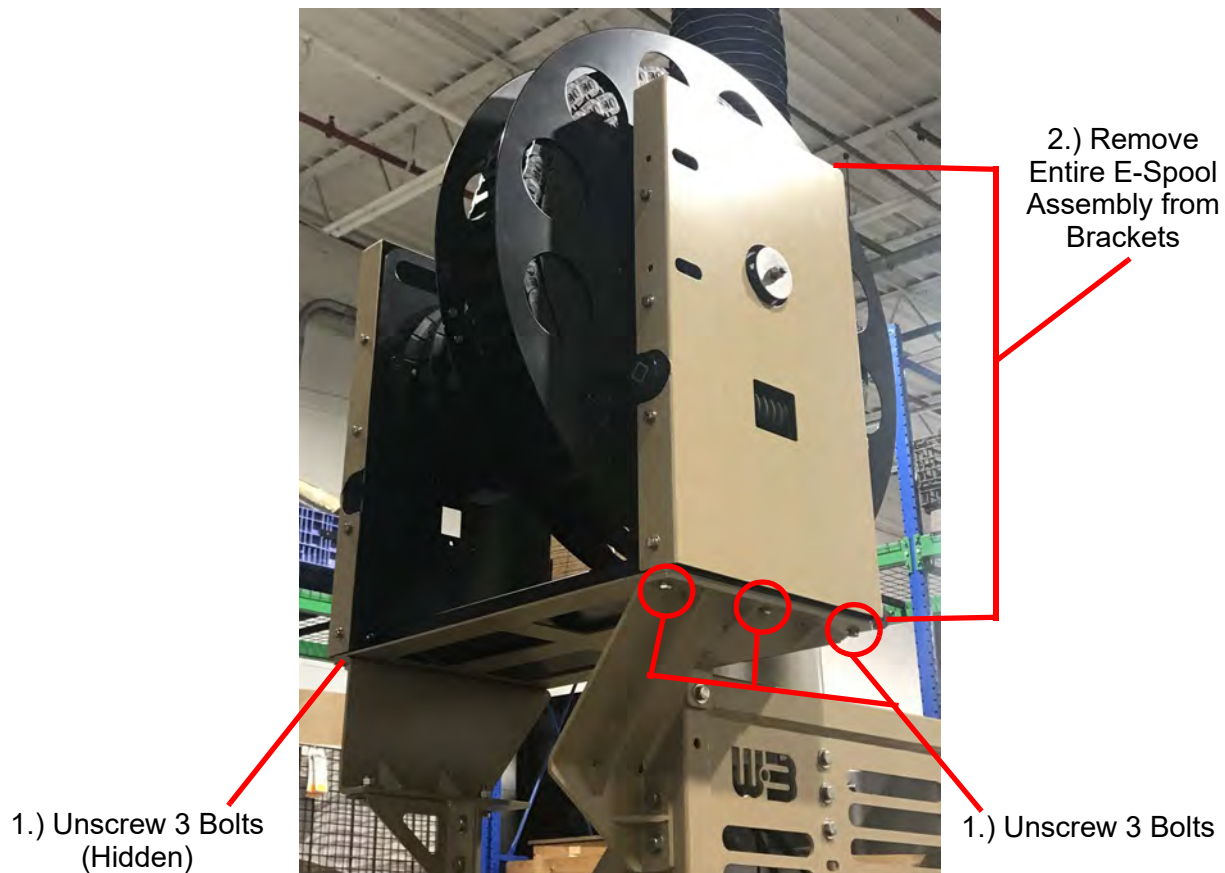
Remove Hardware Connecting Assembly to Unit and Remove Assembly from Unit
